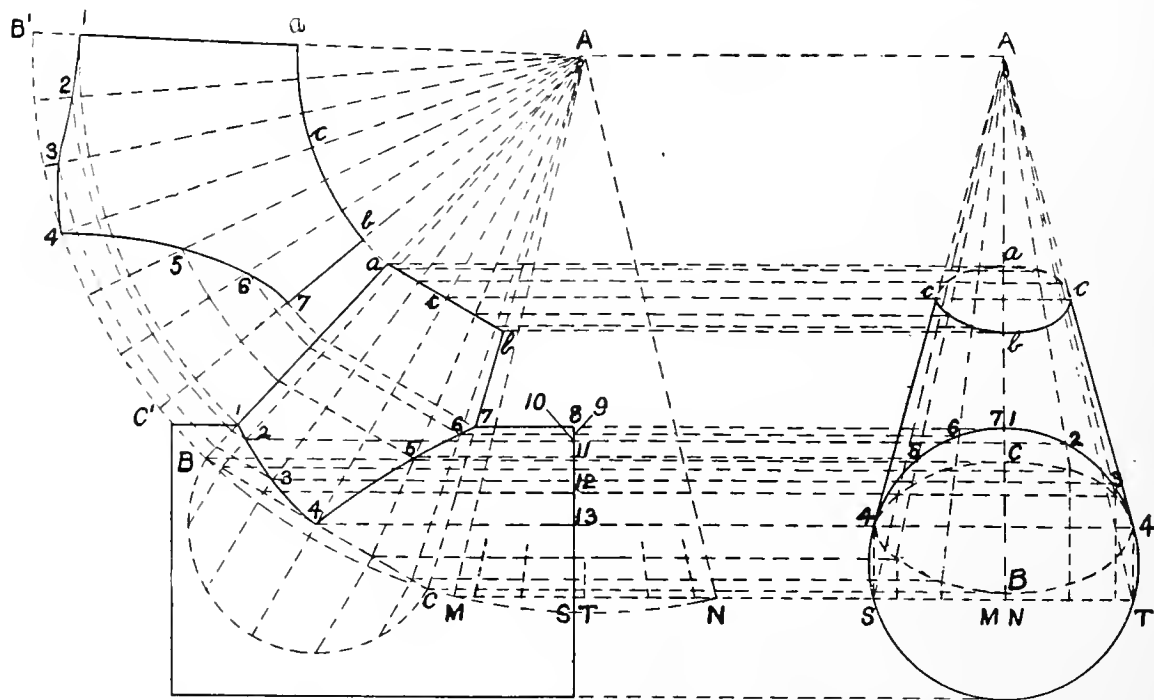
SIDE ELEVATION AND DEVELOPMENT OF CONE.
